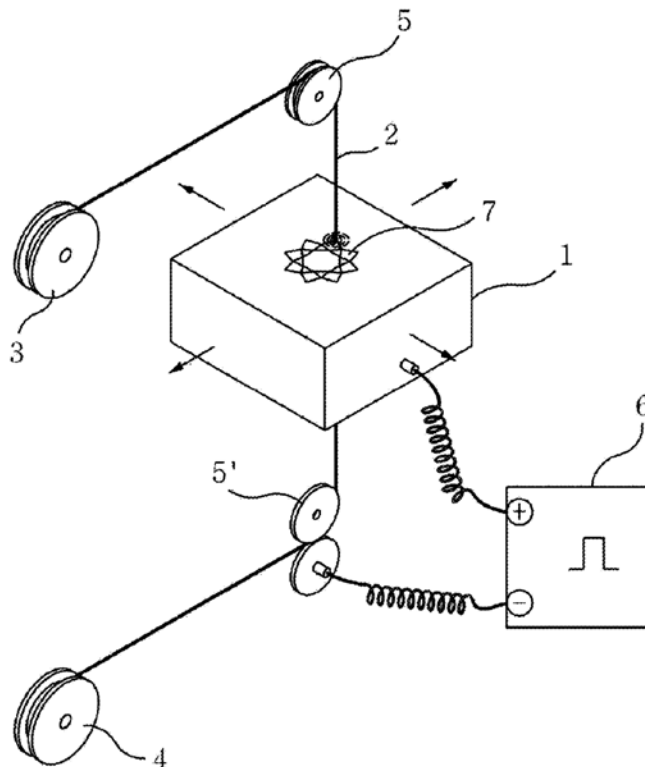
of the '872 patent shows electrode wire 2 inserted into workpiece 1, cutting a pattern into the workpiece as a high frequency voltage is applied between the workpiece and wire and the workpiece and wire are moved with respect to one another. *Id.* at 1:18–53.
